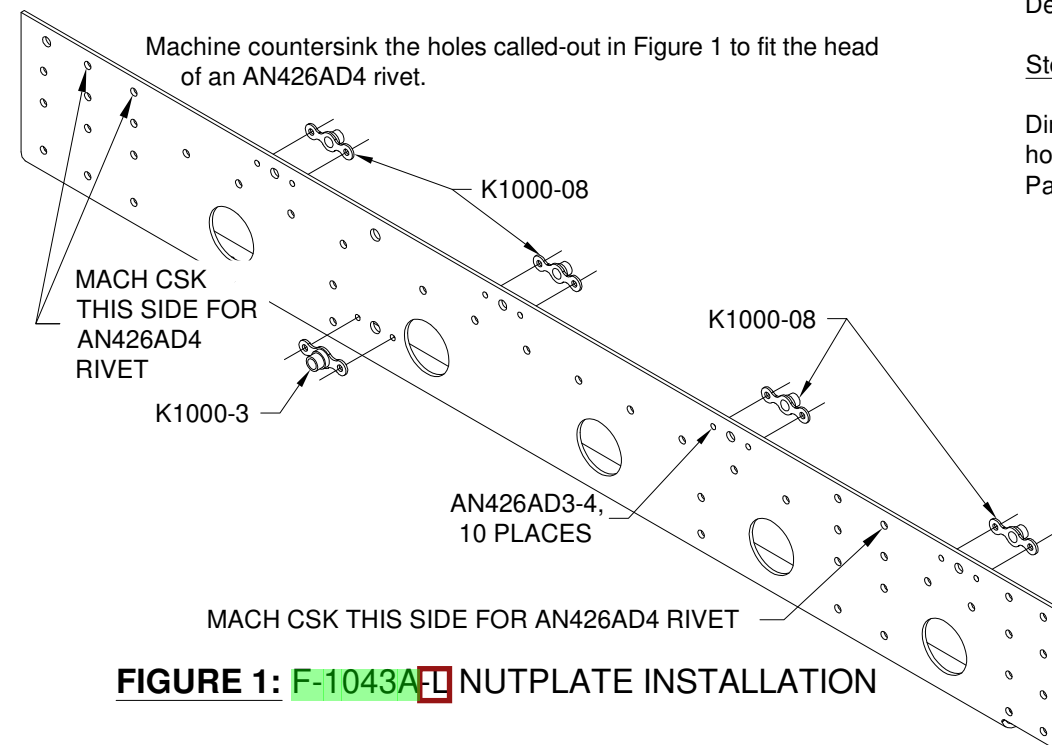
F-1043A-L NUTPLATE INSTALLATION
